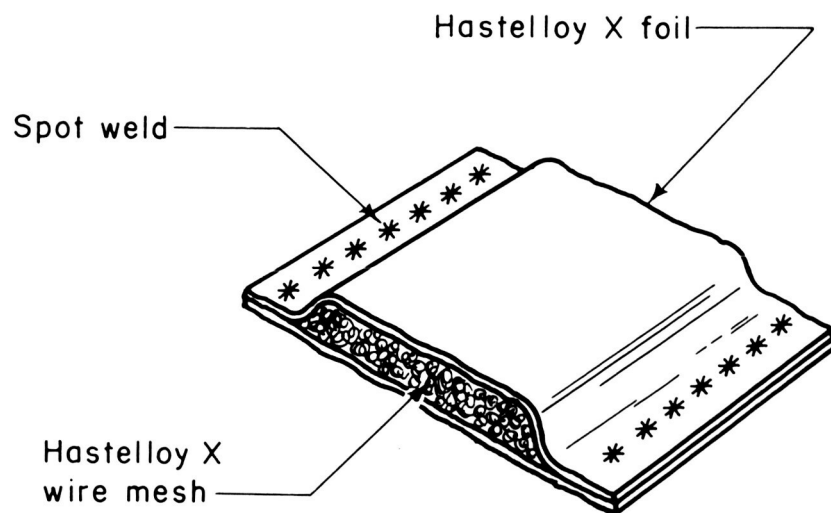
SPOT-WELDED WINDOW-SEAL ASSEMBLY FOR SUPERSONIC AIRCRAFT (REF. 57)
